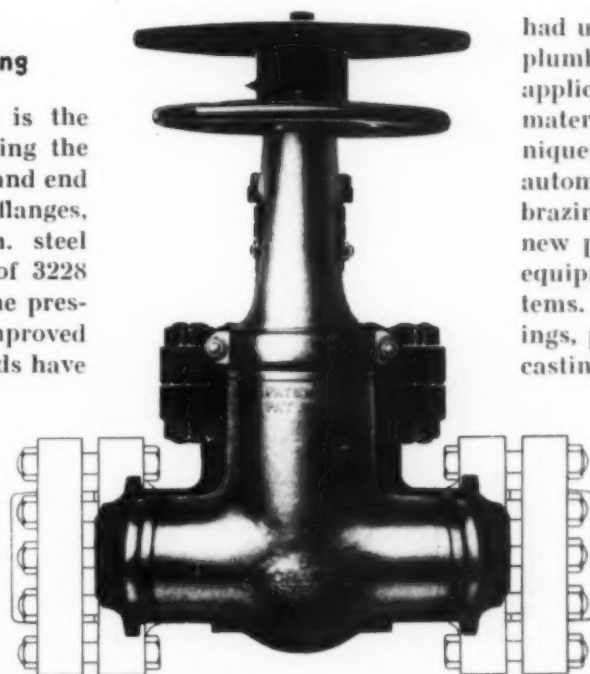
Modern 8-In. Steel Valve With Pressure Sealing and Welding End, Shadowed by Its Much Heavier Predecessor With Bolted End and Bonnet Flanges. Weight of old standard (bolted flanges): 3228 lb.; present-day valve: 985 lb.
